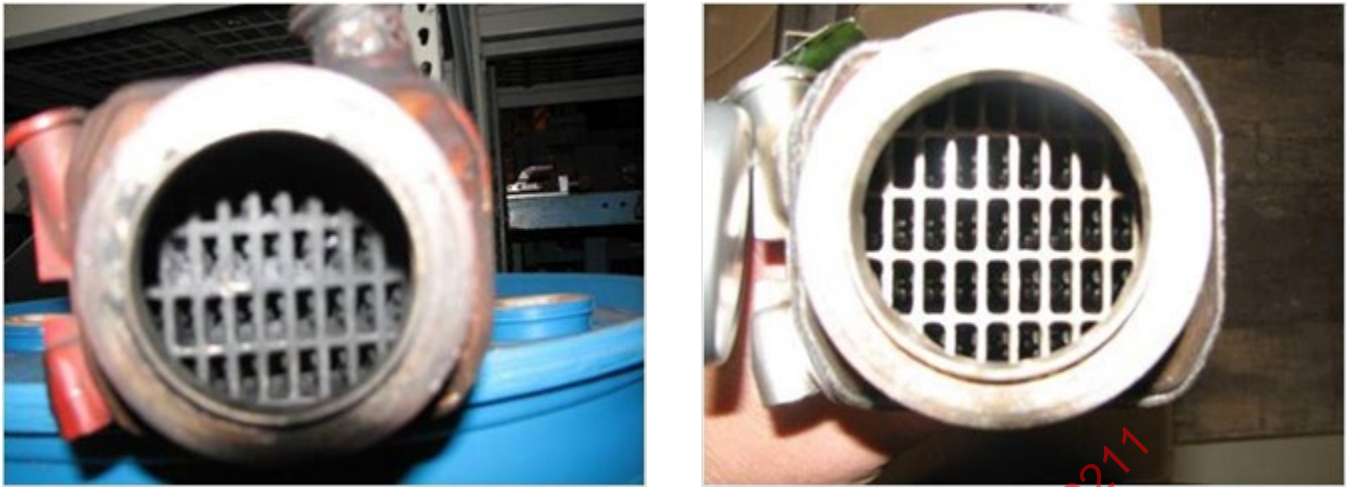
Visual illustration of fouled EGR cooler inlet and tubes
